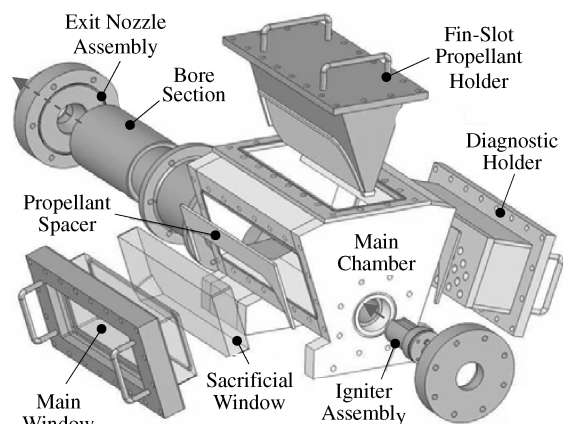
Exploded view of the approximately one-tenth-scale RSRM test rig.
